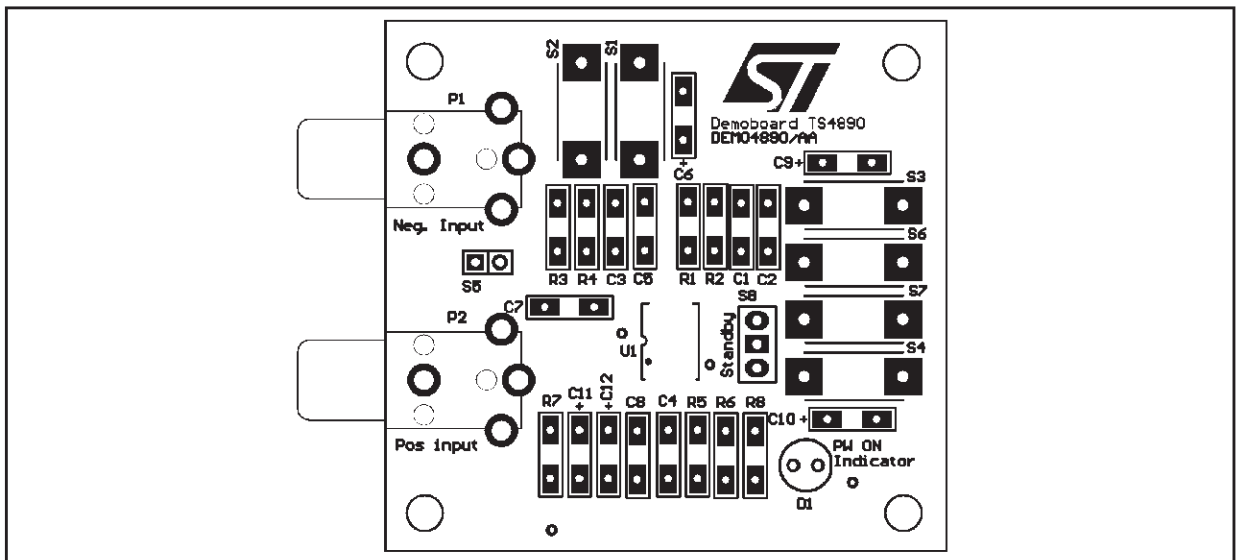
SO8 & MiniSO8 Demoboard Top Solder Layer
